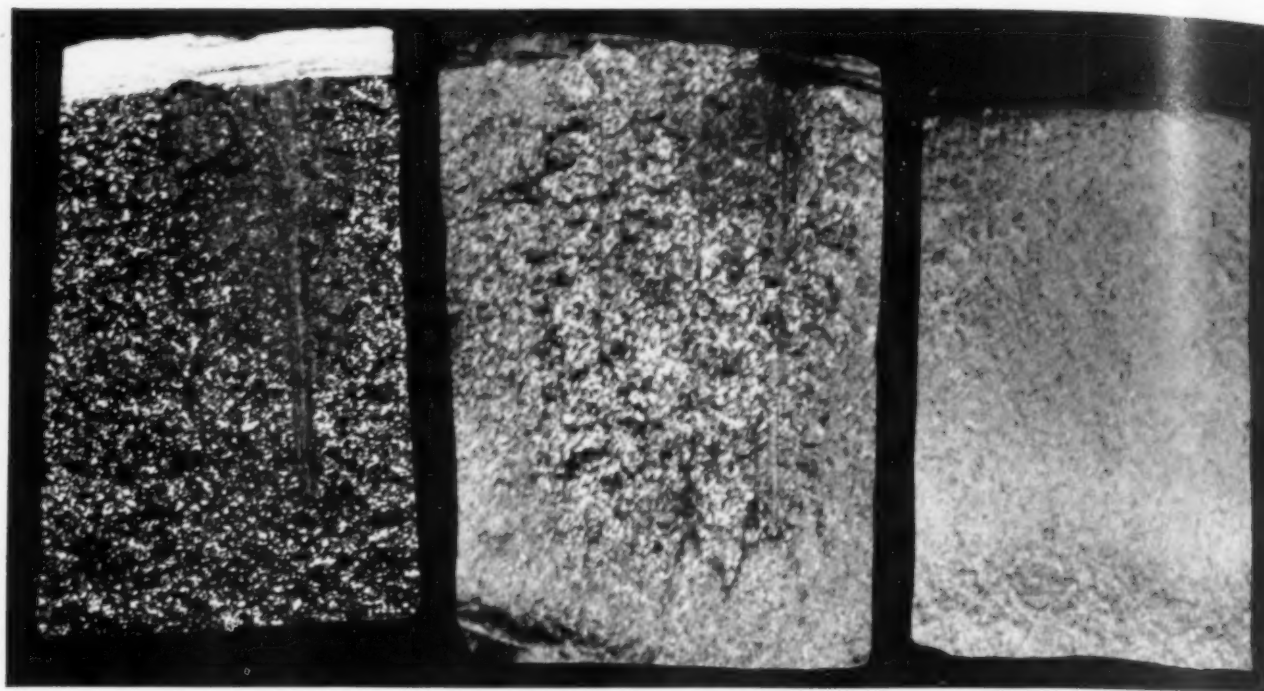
Macrographs of Fractured Rail Heads. At left is "feathery" fracture in rail as rolled; at center is similar defect after
